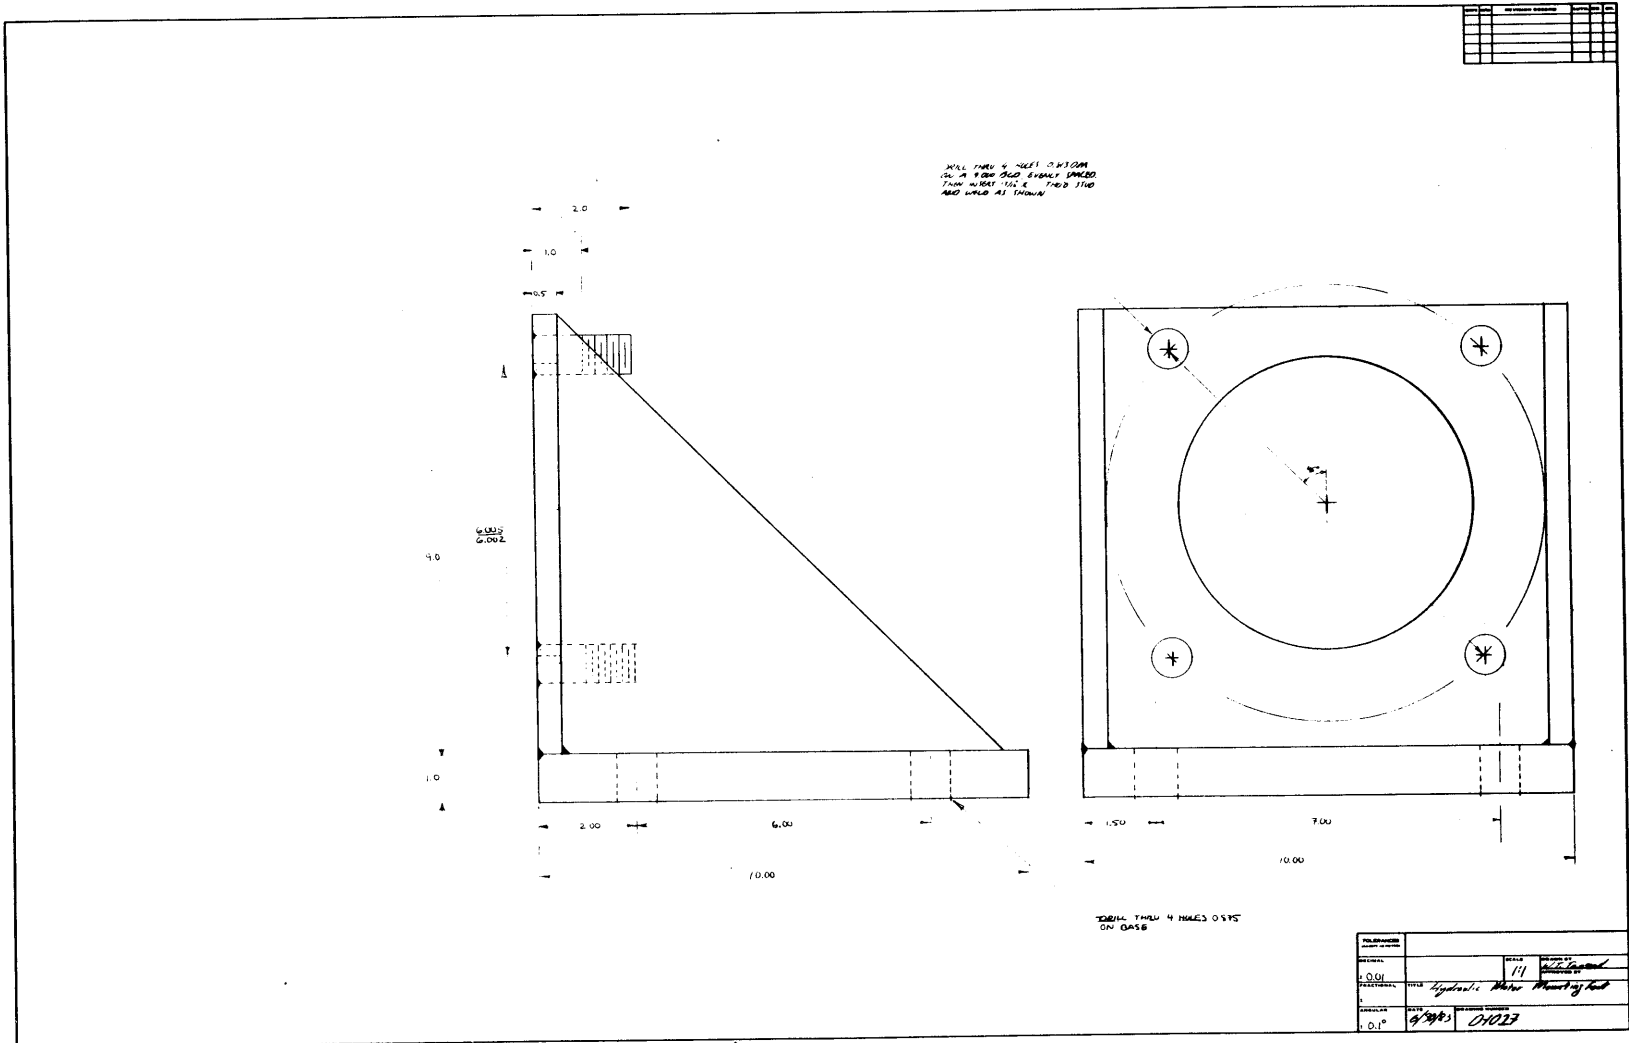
SPIN MOTOR FOOT DRAWING
